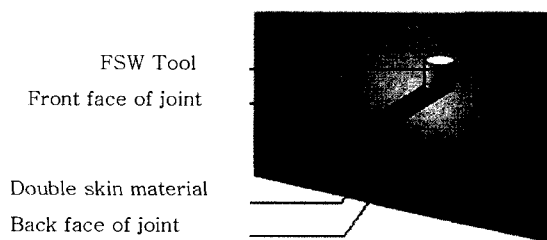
Friction stir welding process to join aluminum extrusion profiles
